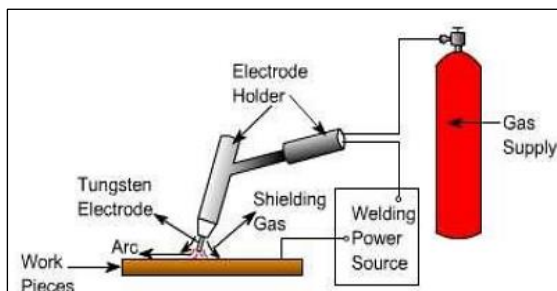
Schematic Diagram of TIG Welding System [2].
